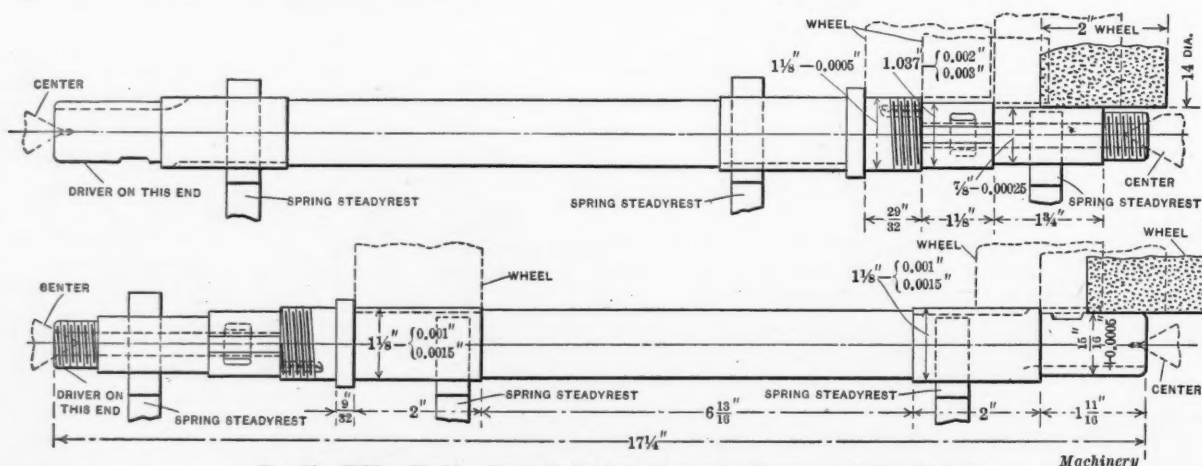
Milling Machine Keyshaft finished all over by Traverse Grinding Method
